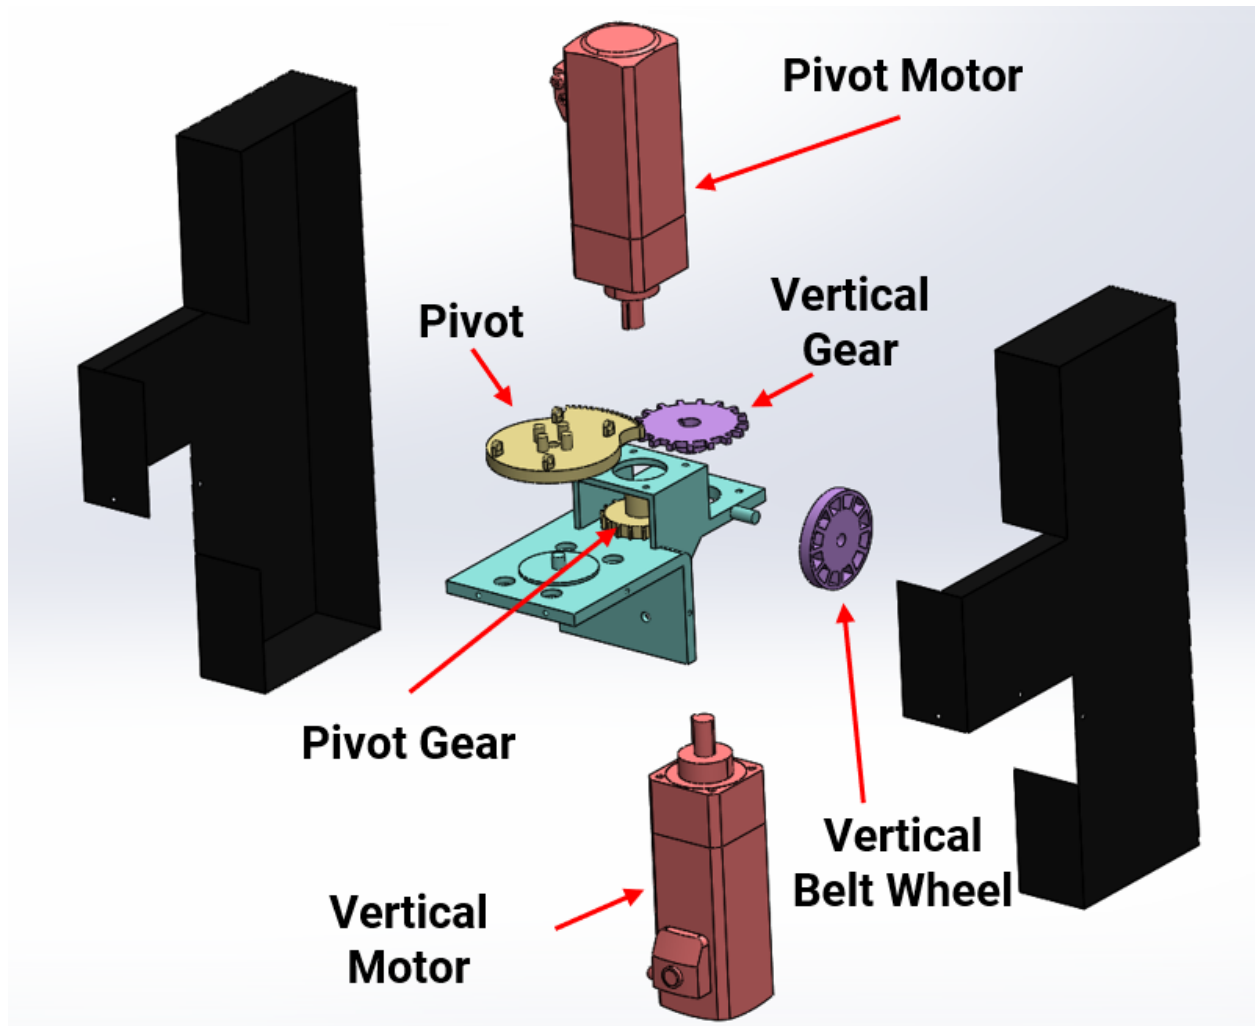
Exploded View of Motor Housing, with Internal Components.
